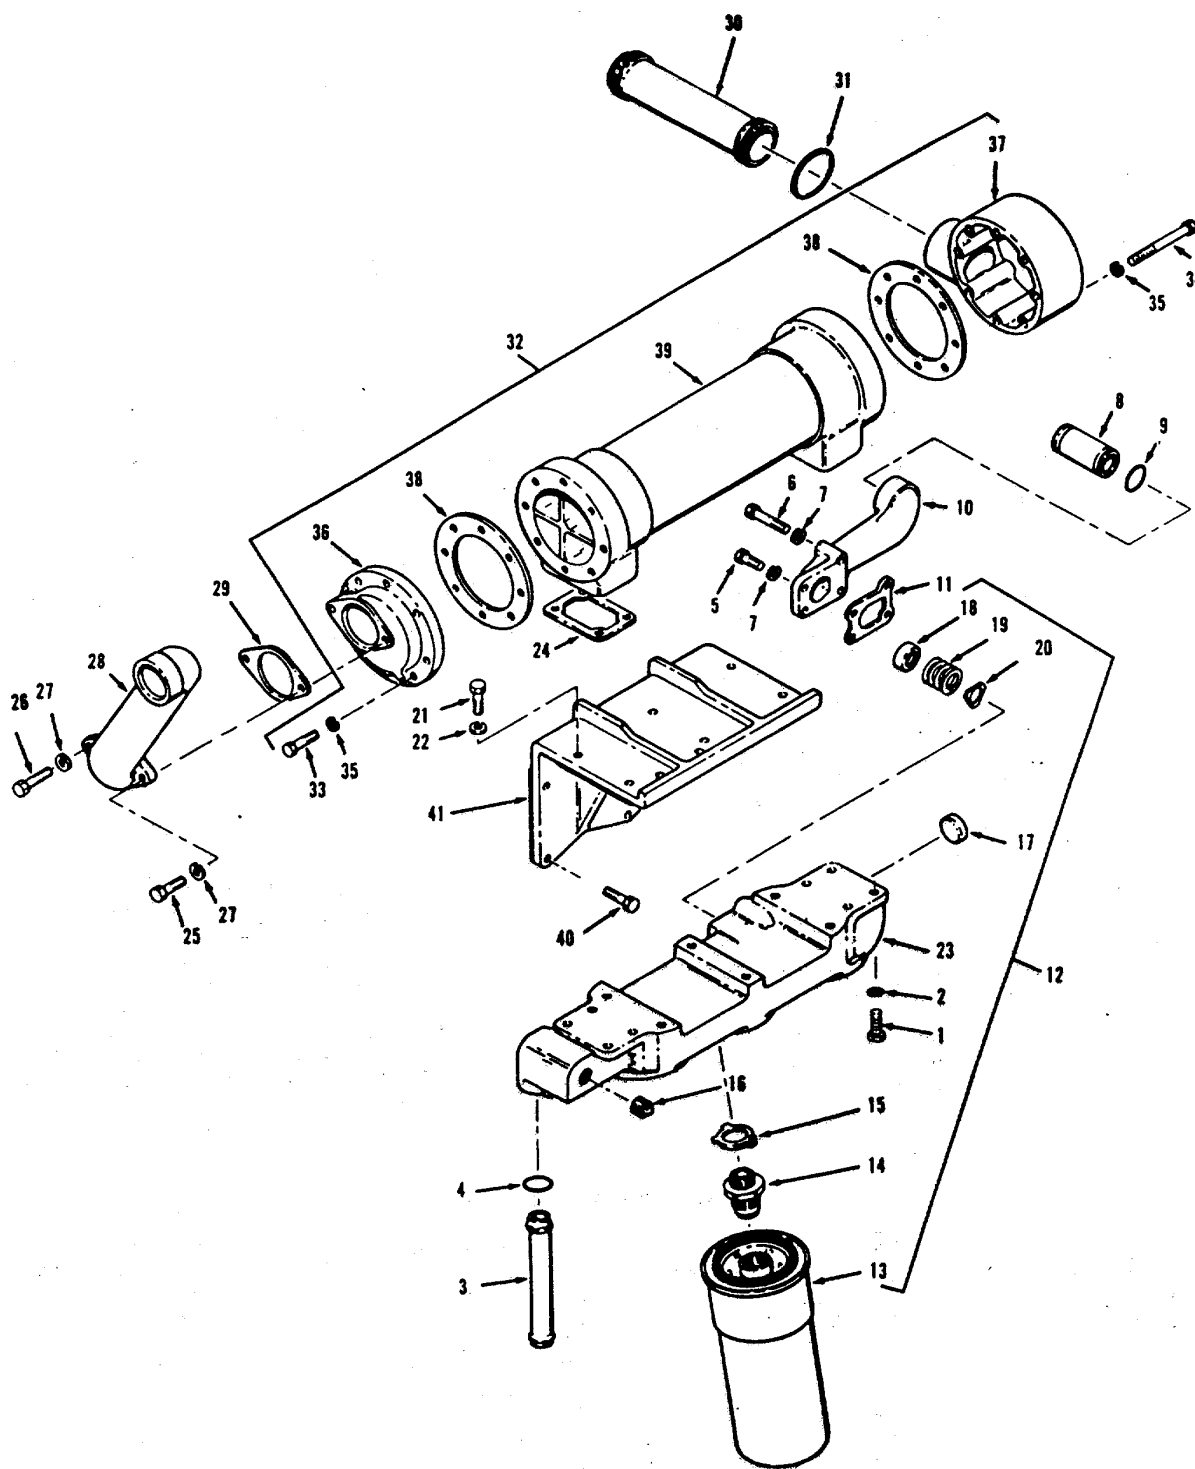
Lubricating Oil Cooler, Exploded View, Code A
